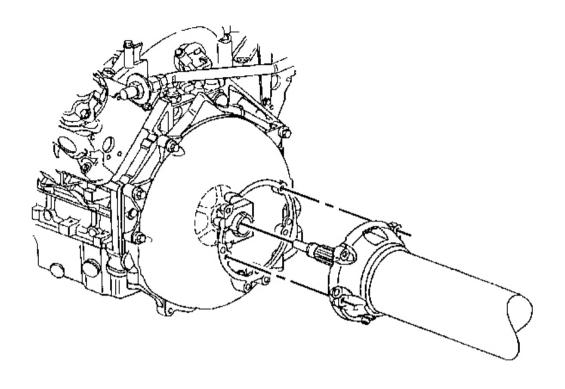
Propeller Input Shaft & Rear Of Engine Flywheel Housing Courtesy of GENERAL MOTORS CORP.
